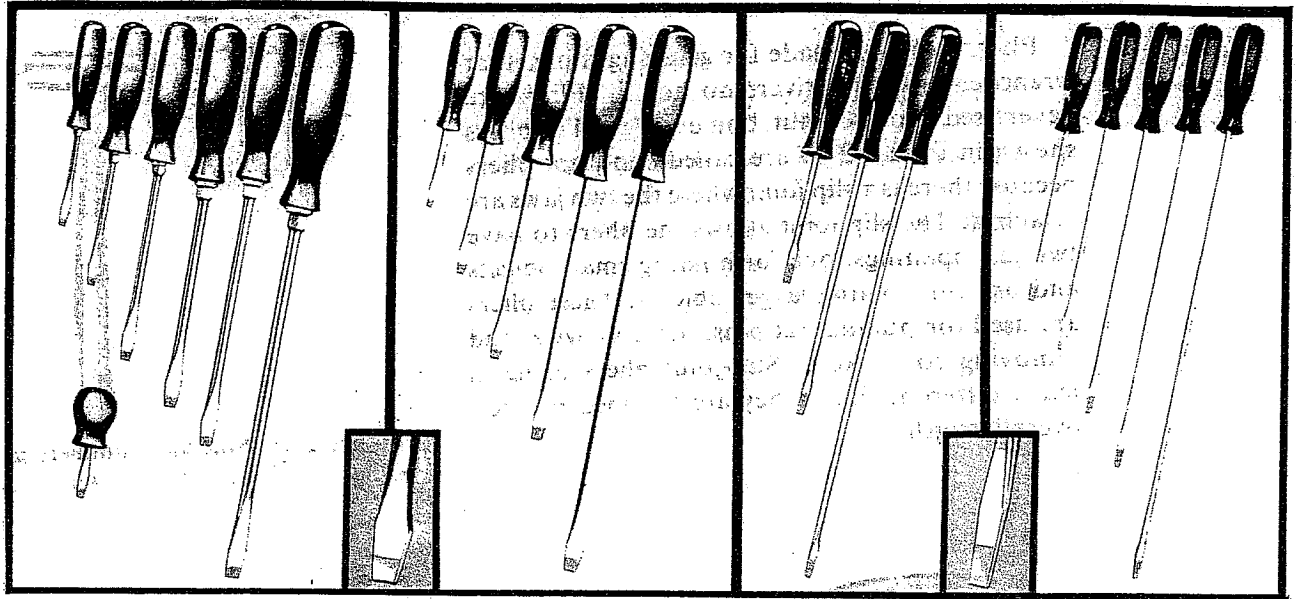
A flat-blade screwdriver is used with slotted screws. (Snap-On Tools Corporation)
